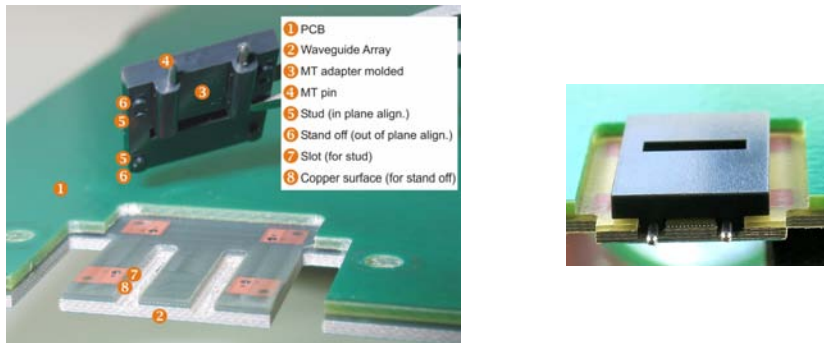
Image of injection molded MT adapter and its mating site in the optical PCB (*left*), and of injection molded MT adapter inserted in PCB with illuminated waveguides (*right*).
